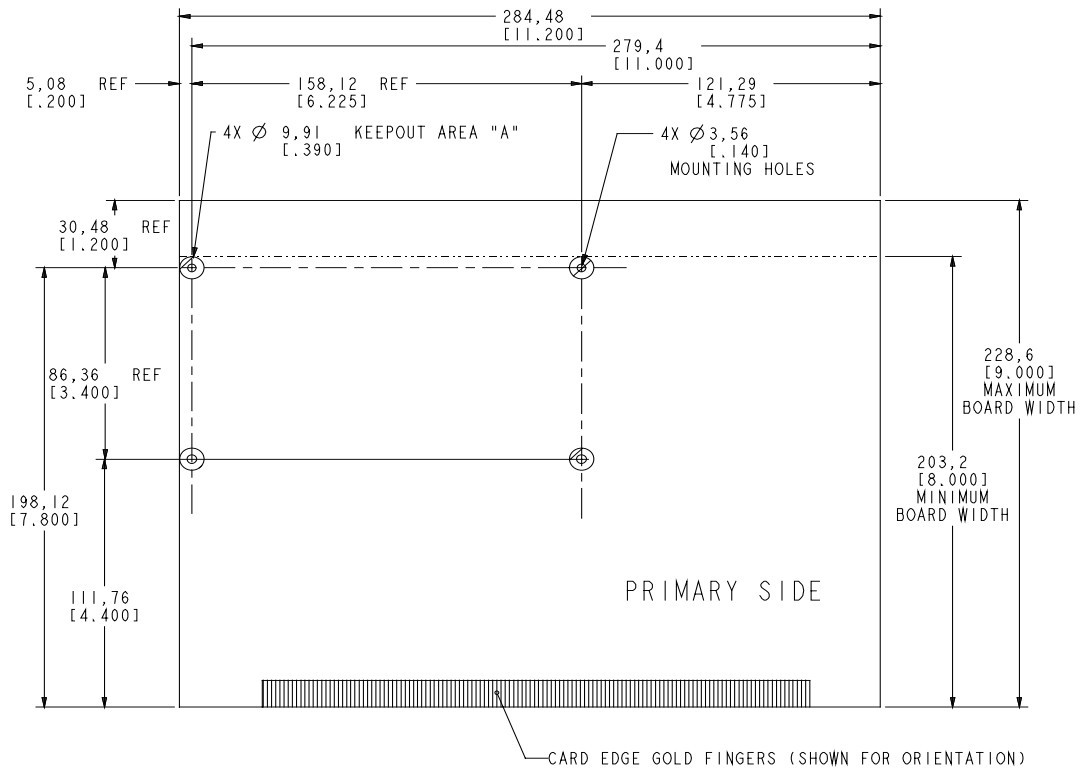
NLX Motherboard Dimensions—11.2" Primary Side
